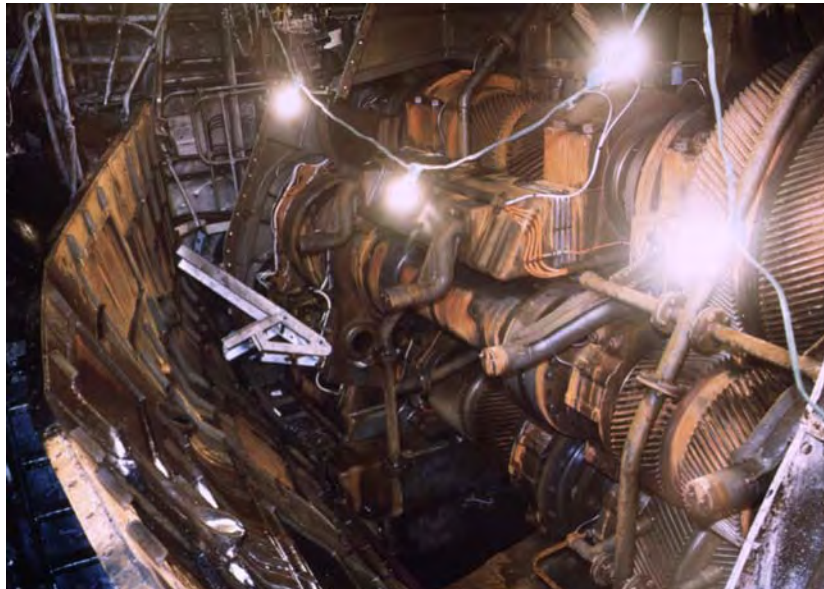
HMS *ILLUSTRIOUS* GEARBOX EXPLOSION
